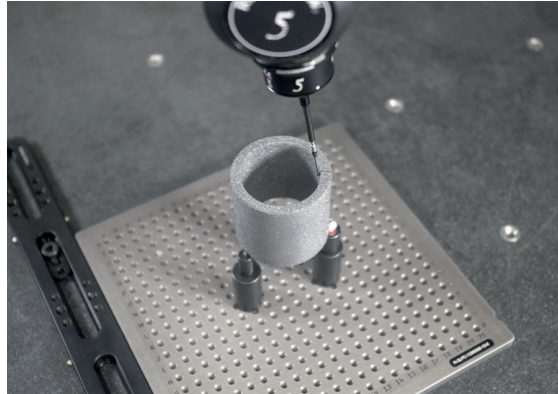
Test conditions in a Grade 1 laboratory using a CMM fitted with a Renishaw REVO 5-axis measurement system.
